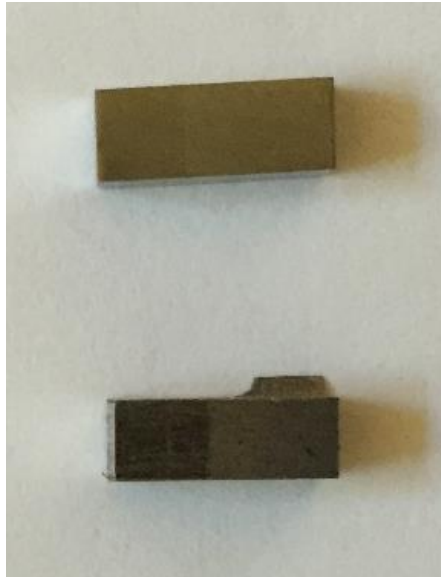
Specimen Samples, Lapped with 220-800 Grit Abrasive Paper (Top), as Machined (Bottom).
